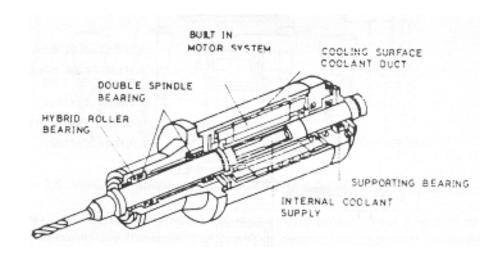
Motorised Spindle with Hybrid Bearings.
